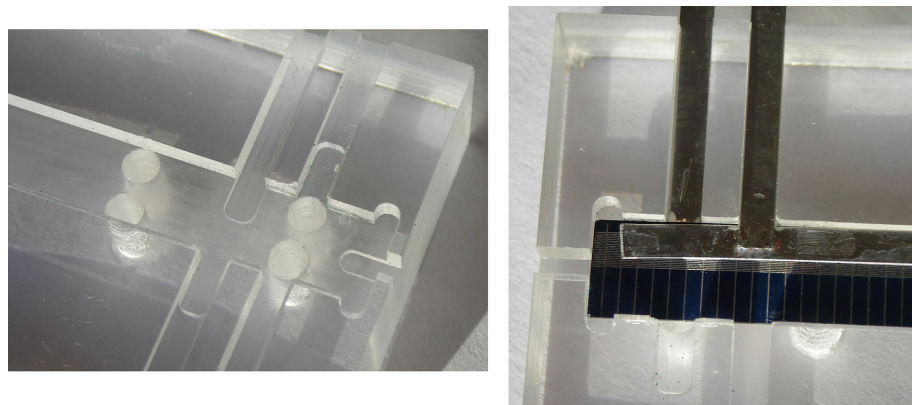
Two-part cell edge clip showing (a) separate parts (b) complete
